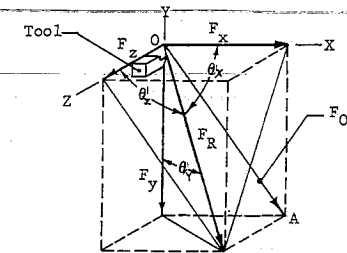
Rectangular components of the workpiece forces acting on the tool.
